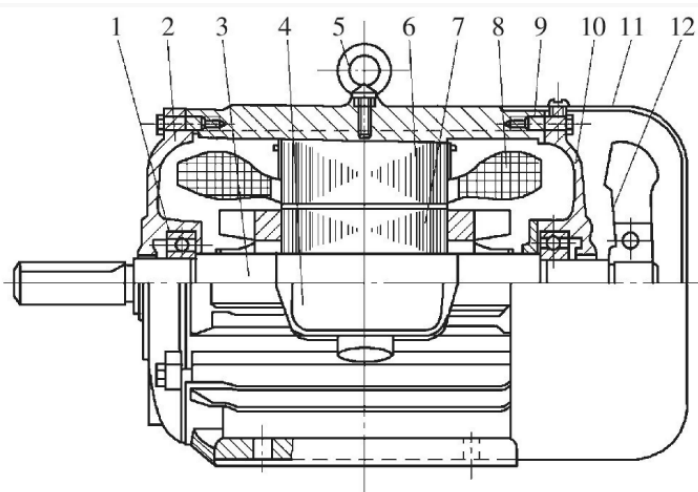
Configuration of squirrel cage threephase asynchronous motor. 1, bearing; 2, front end cover; 3, shaft; 4, terminal box; 5, ring; 6, stator core; 7, rotor; 8, stator winding; 9, frame; 10, back end cover; 11, fan housing; 12, fan.
